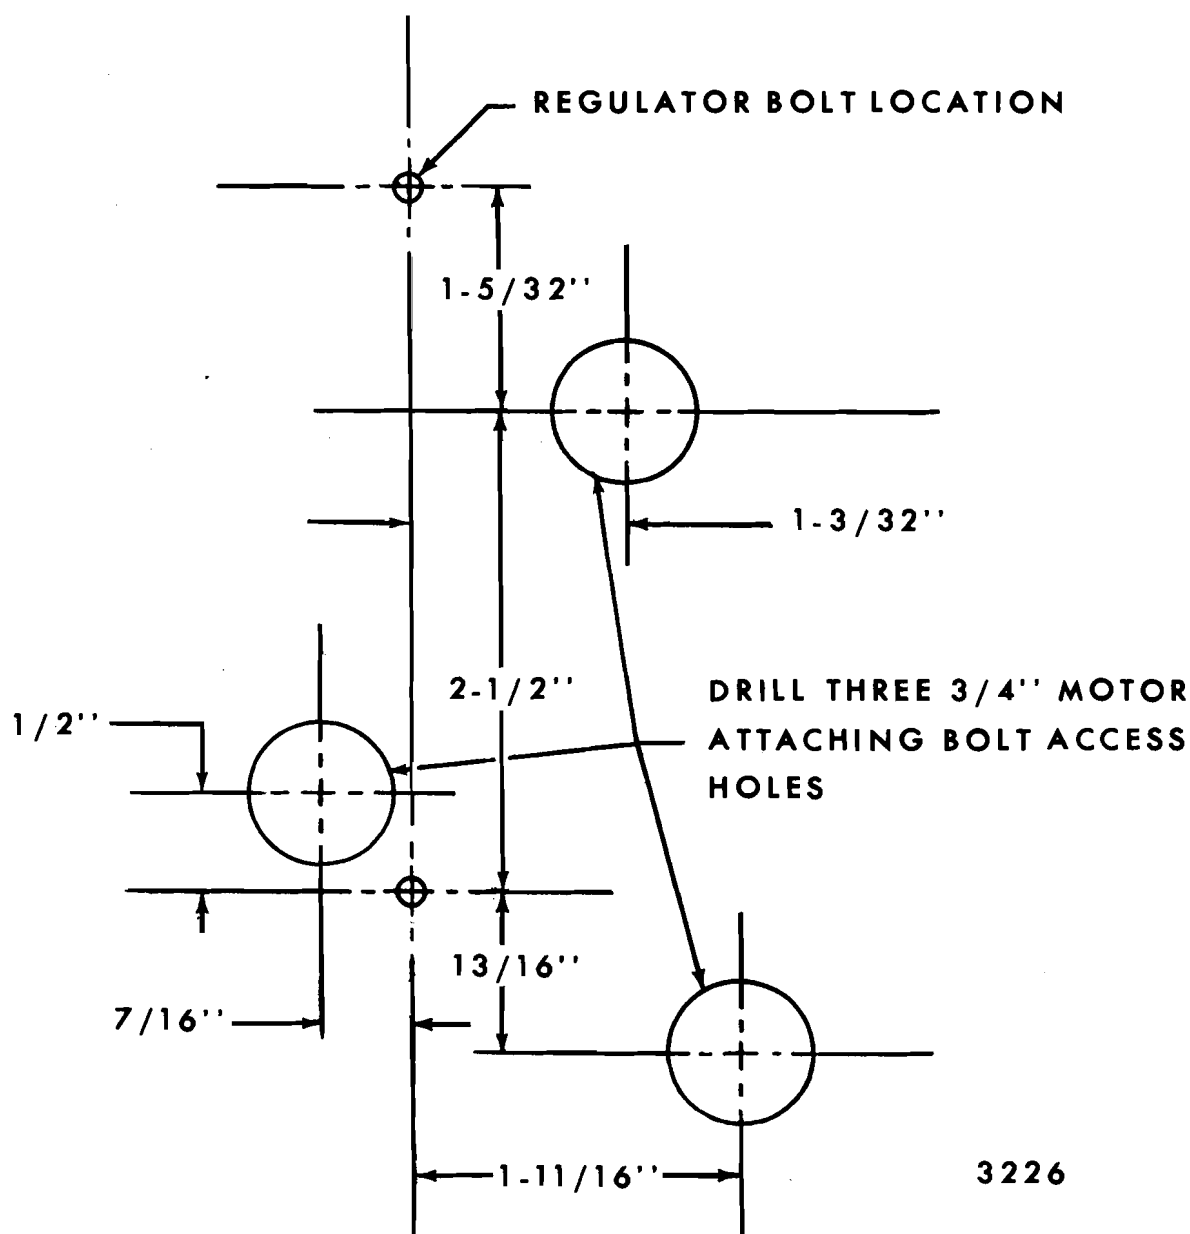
Window Regulator Upper and Lower Left Attaching Bolt Reference Points for Locating Window Motor to Regulator Attaching Bolts - "A-27 and 77" Styles
